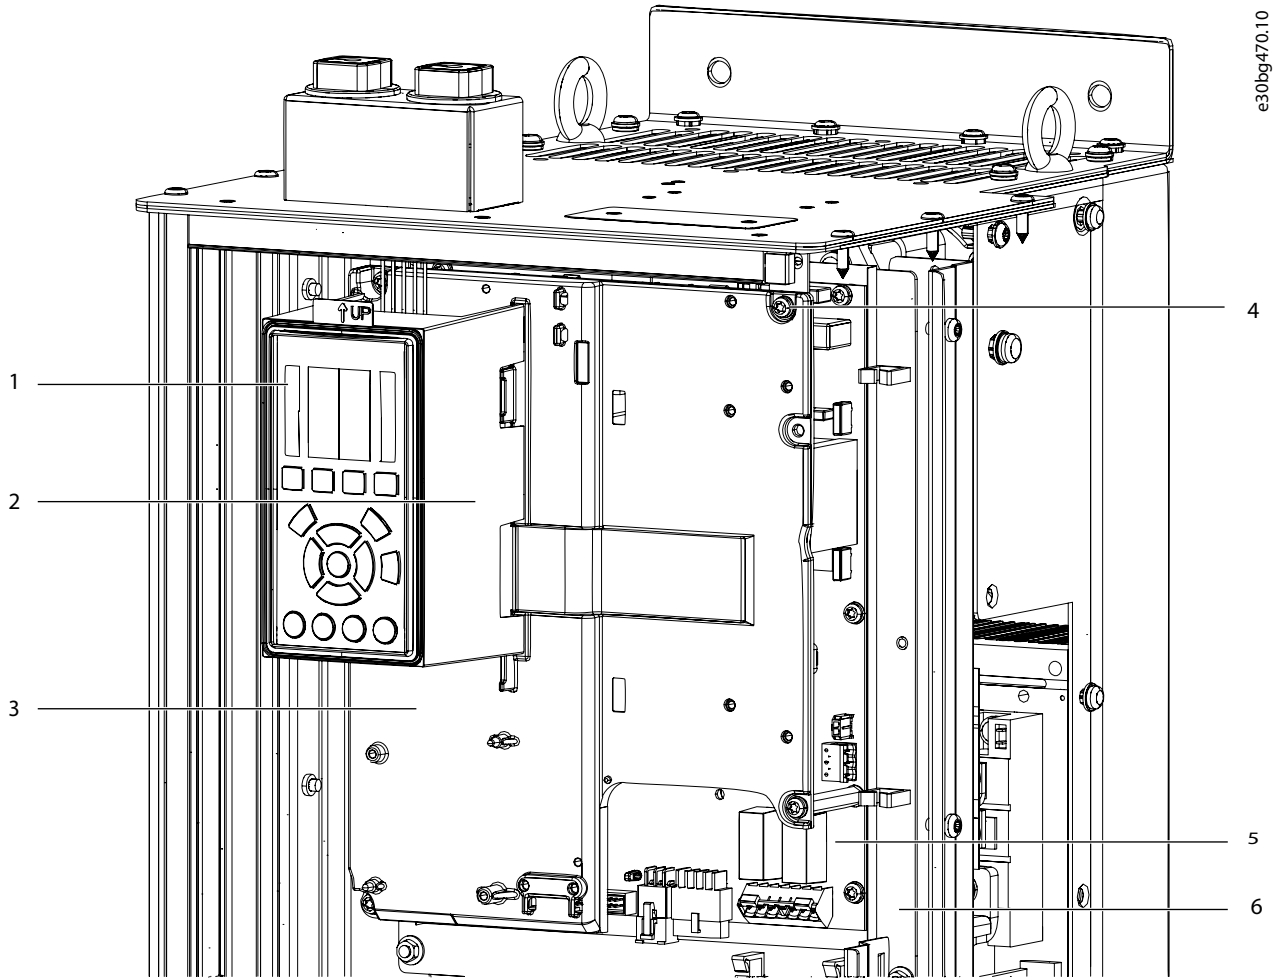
Control Card Mounting Plate and Power Card Mounting Plate
